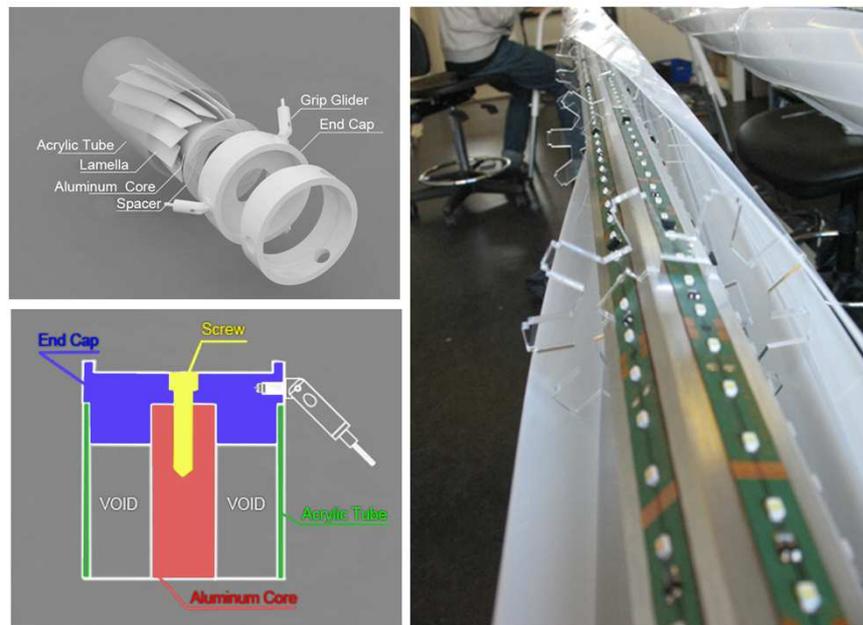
Assembly of a compression member (left top and right), a drawing of an end-cap (left bottom)
